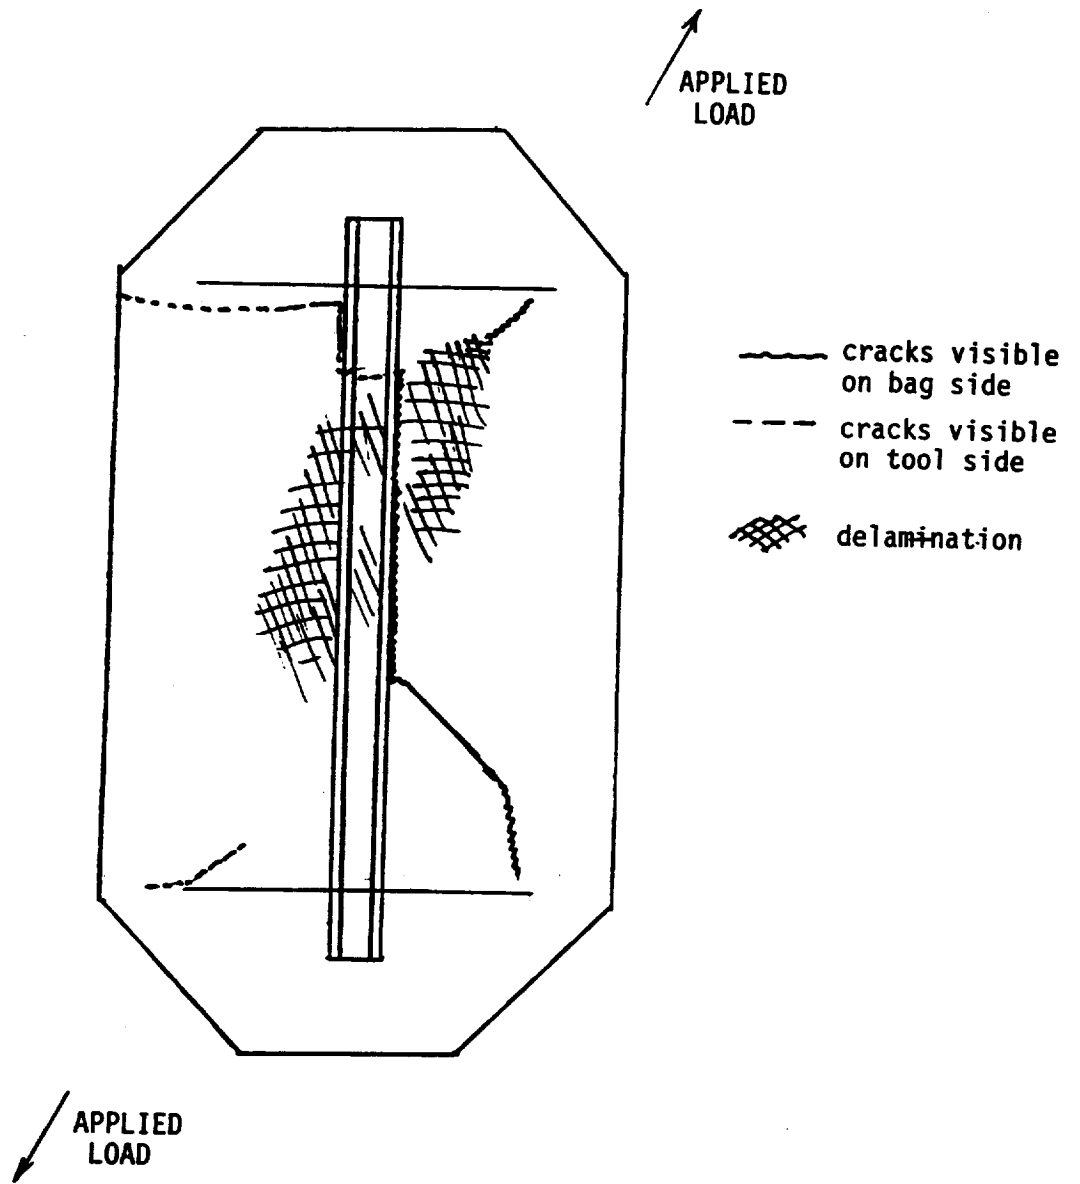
SCHEMATIC FAILURE MODE OF FRAME-STIFFENER INTERSECTION SPECIMEN
